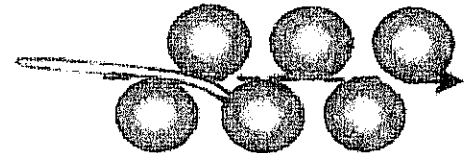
The leading edge of a blank or part, when fed into a closed-entry, or nonthroated, machine may not rise over the third roll, causing a jam.
